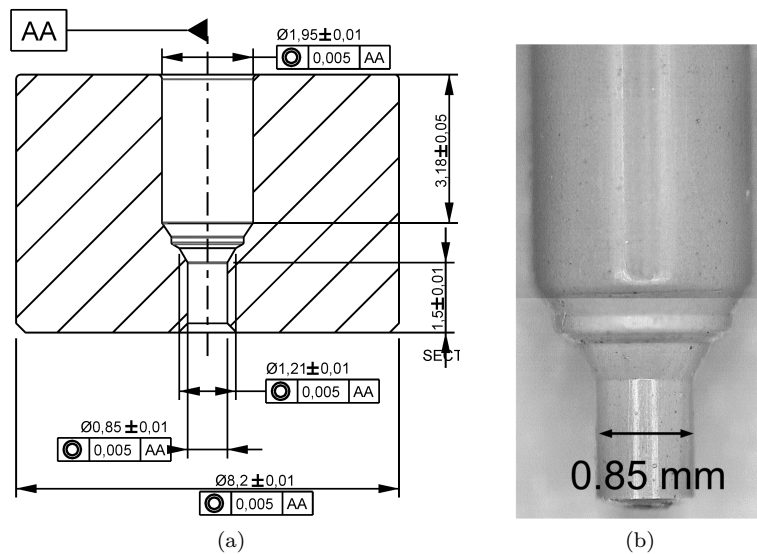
Example of quality control of a die with a complex internal geometry and strict tolerance requirements. A part of the technical drawing is reproduced in (a) and a photograph of a replica of the machined die is shown in (b)
